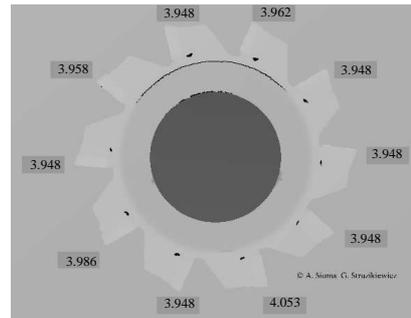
Results of measurement of the height of assembly of cutting inserts edge expressed in [mm]
